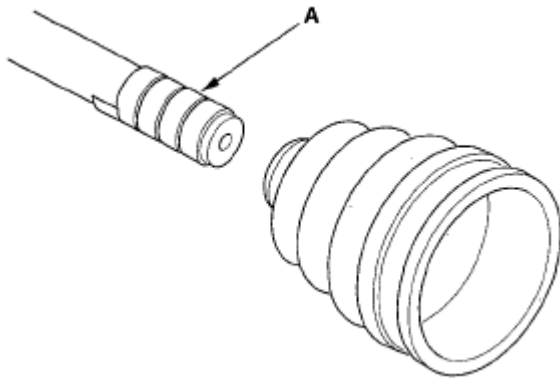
Wrapping Driveshaft Splines With Vinyl Tape
